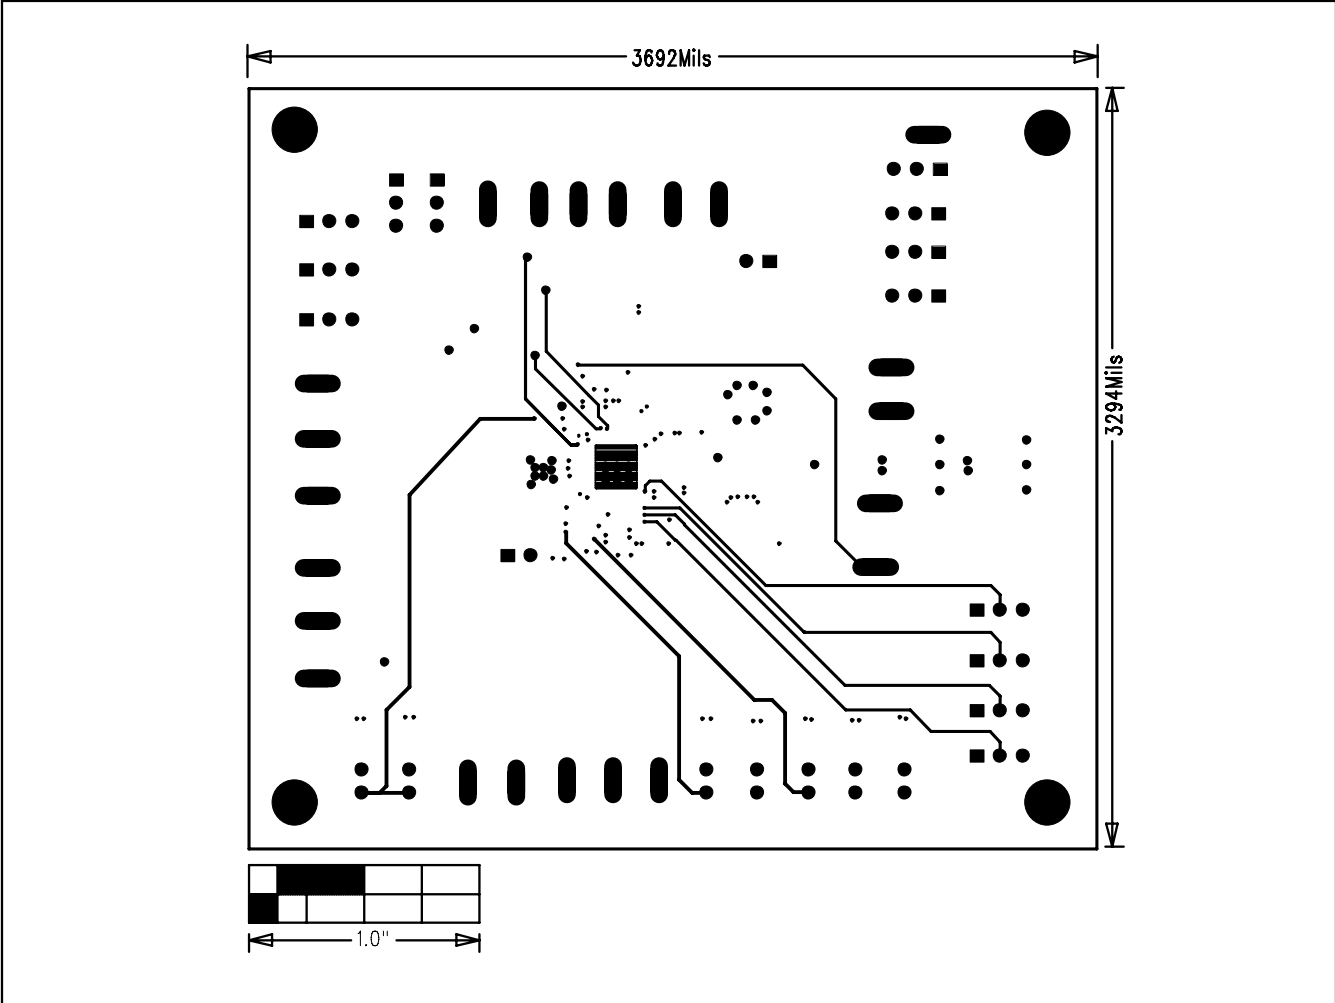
MAX8662 EV Kit PCB Layout—Routing Layer 5
